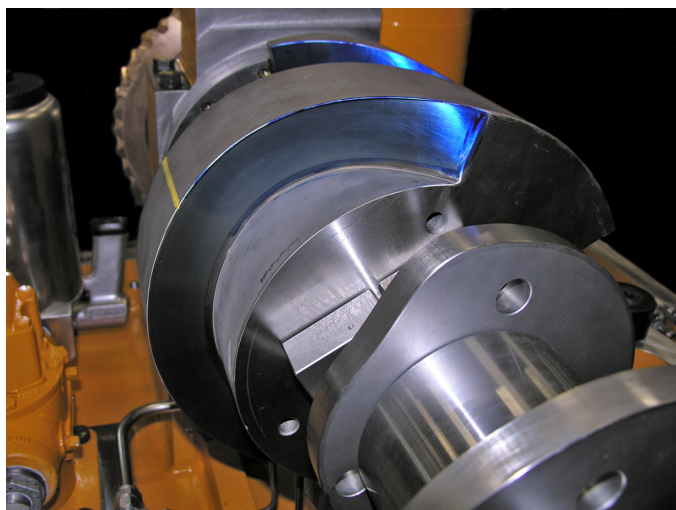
EXIT SURFACES WITH HIGH SPOT BLUING
